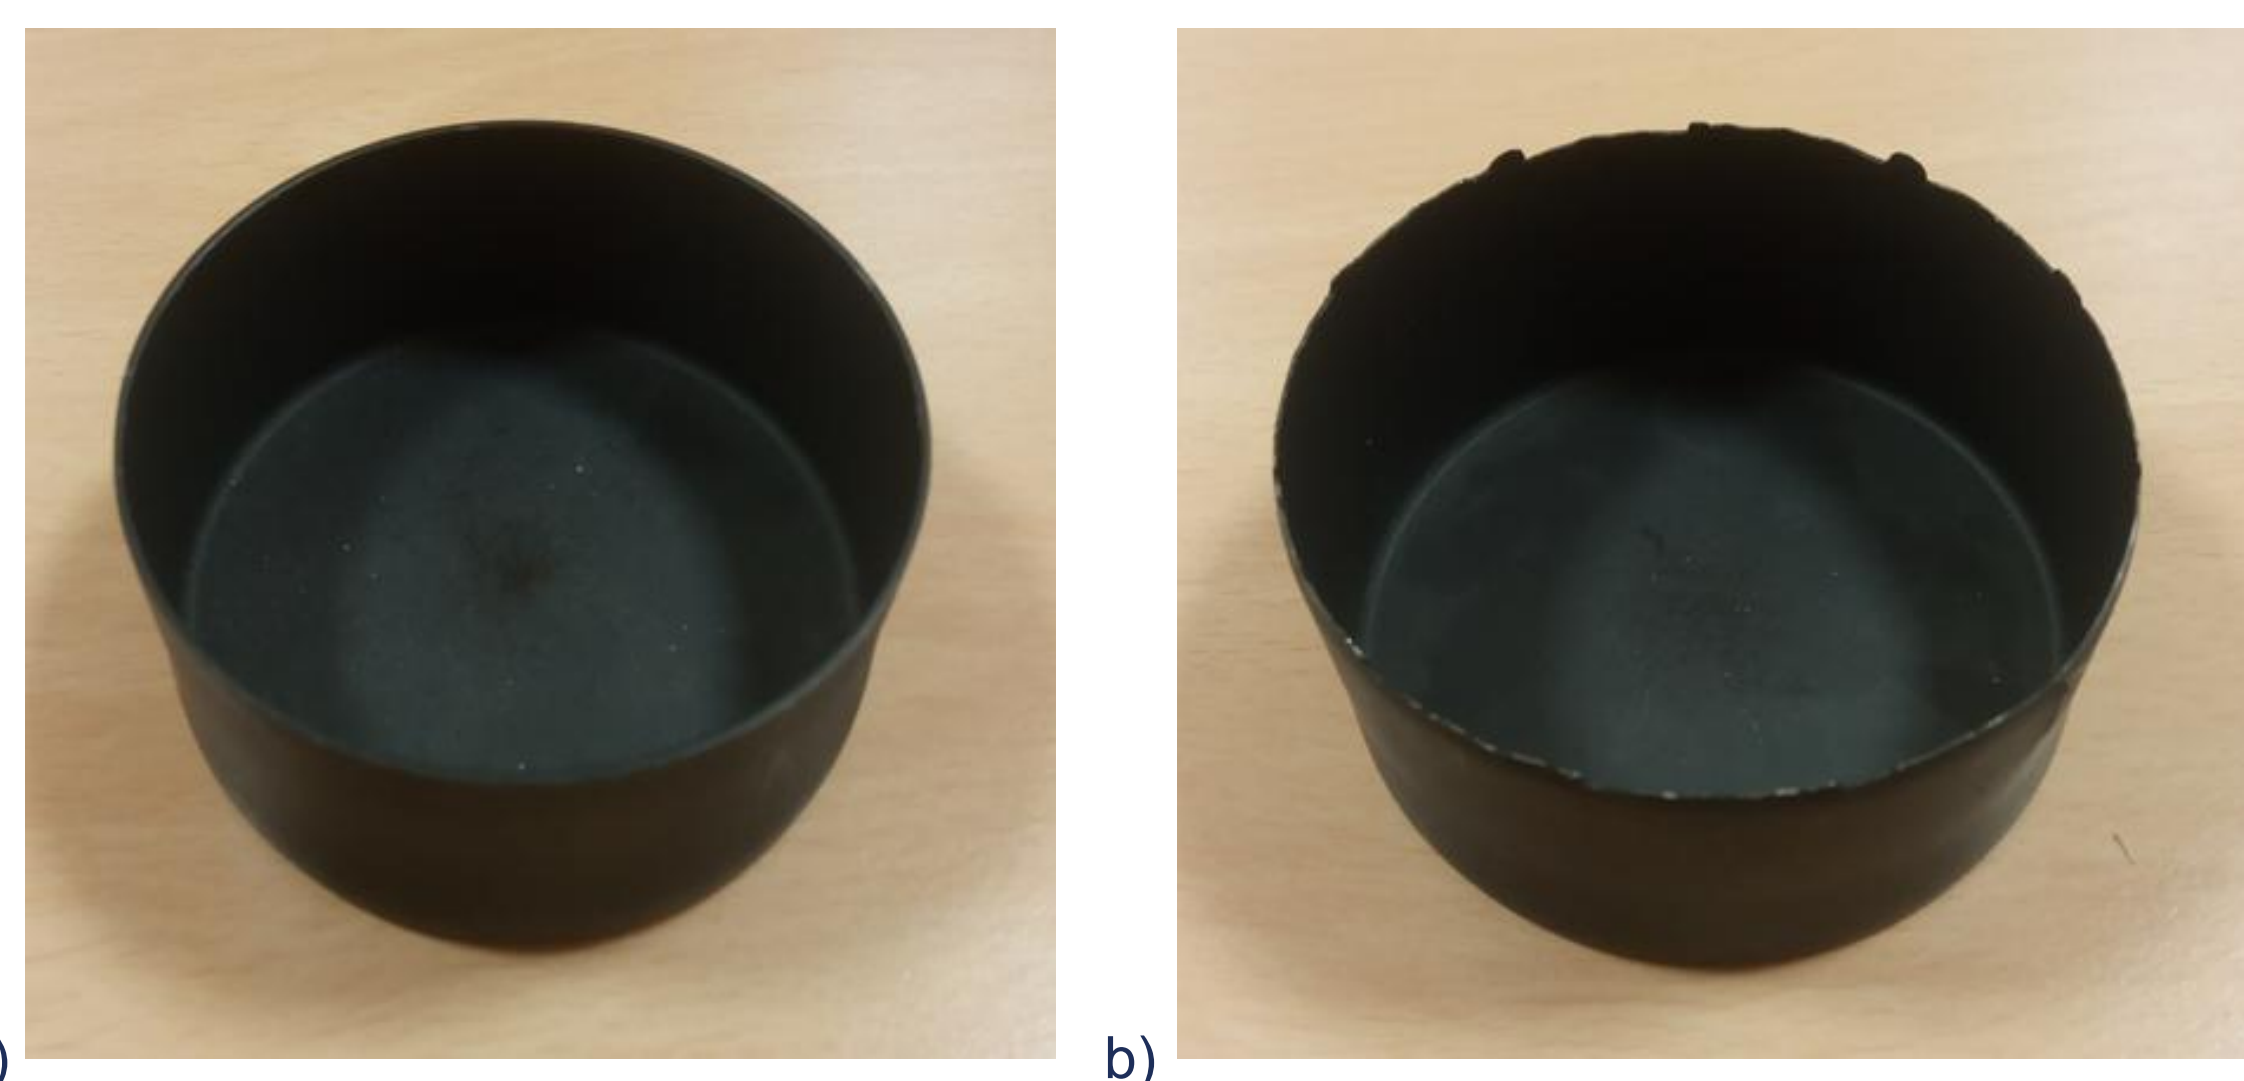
Examples of images from the collection: a) details made correctly, b) details made defectively
